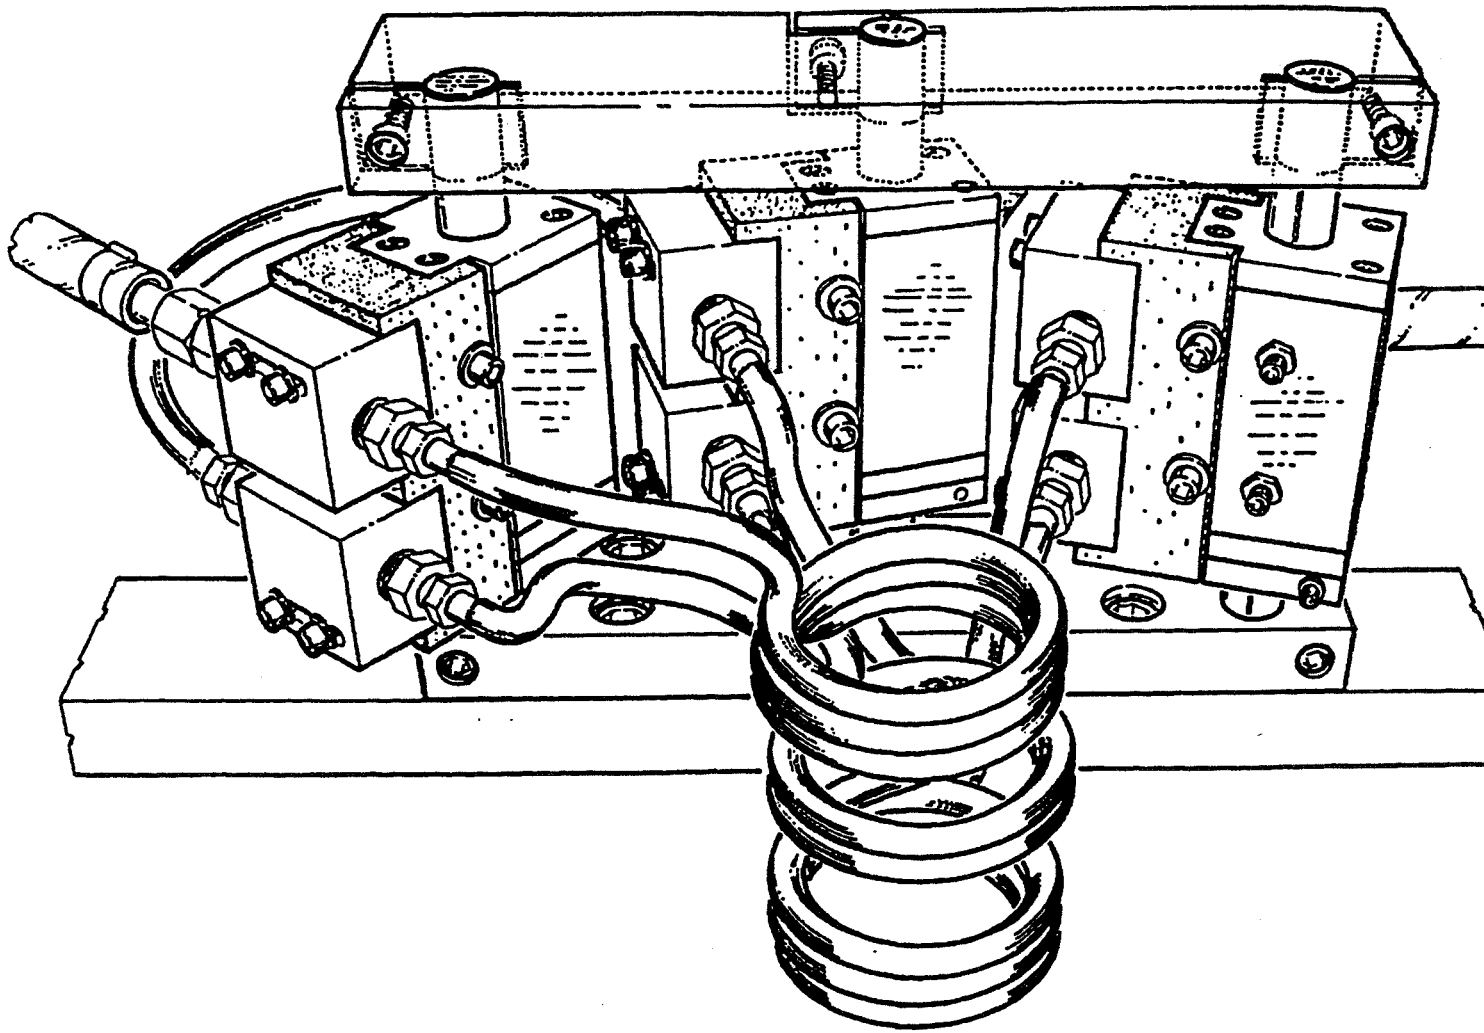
Adjustable work coil fixture for direct induction heating {NASA-Glenn drawing CD-99-31558}
